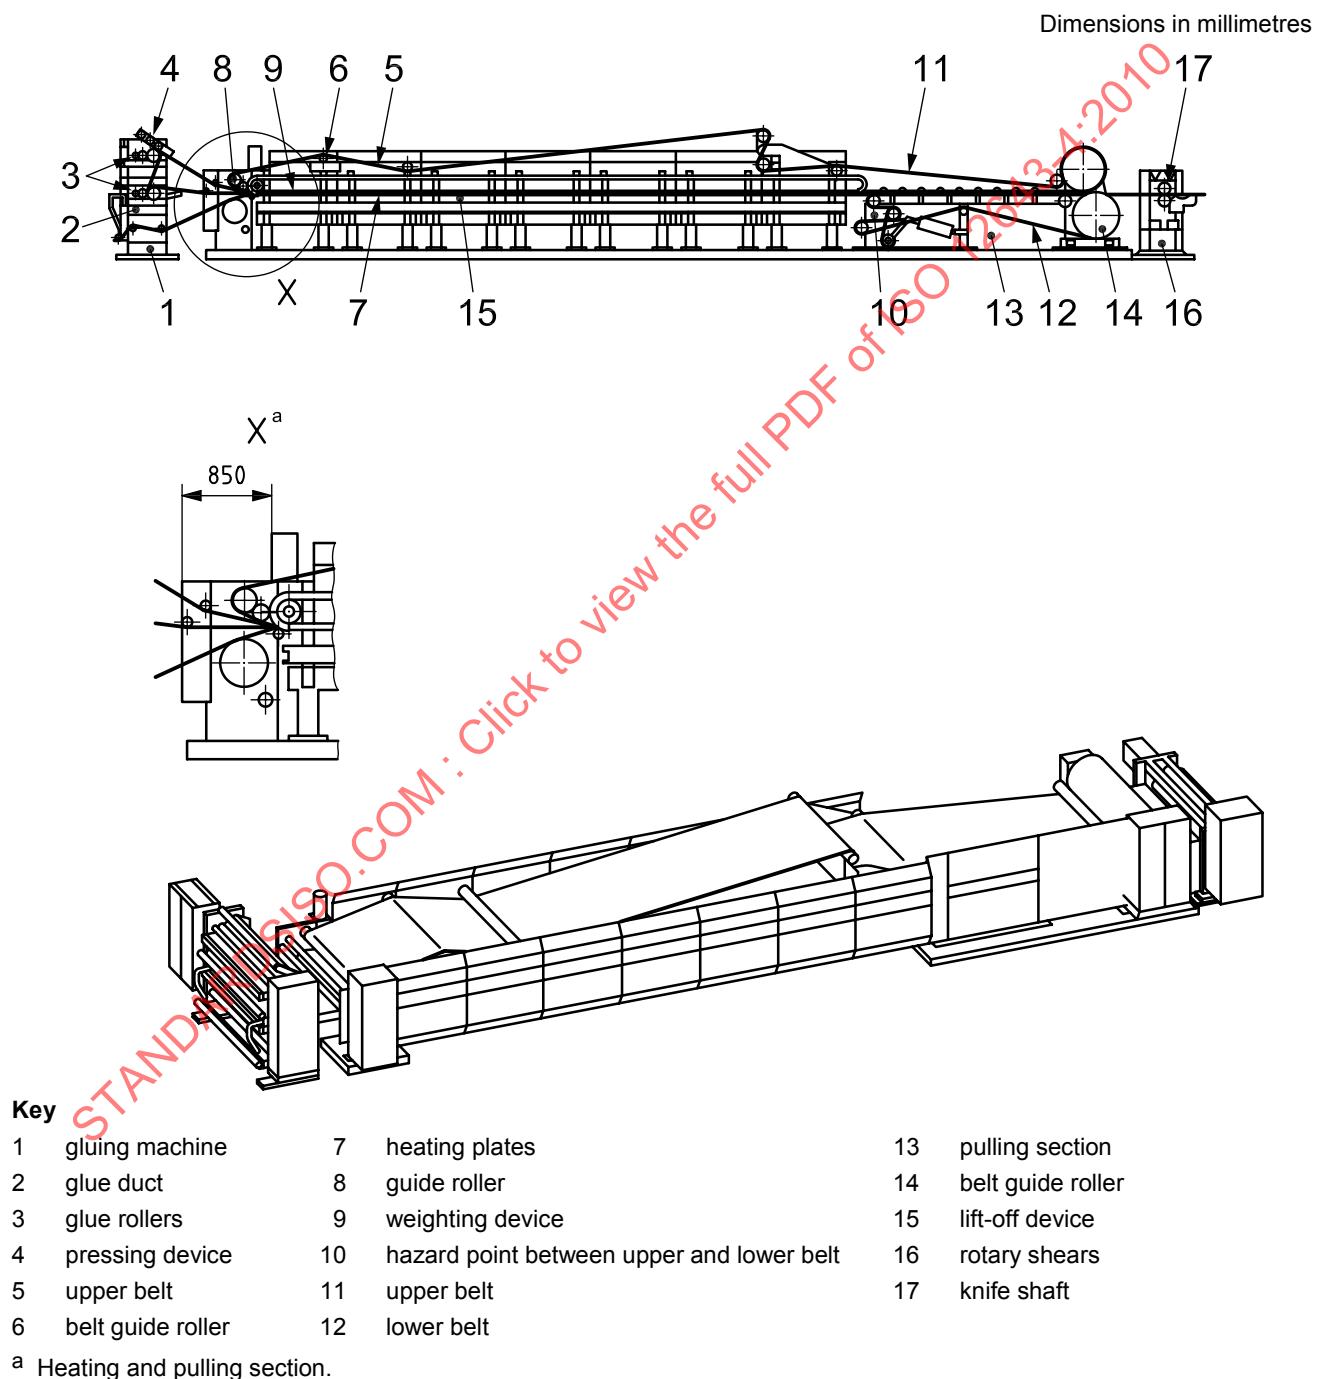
Gluing machine, heating and pulling section, rotary shears
